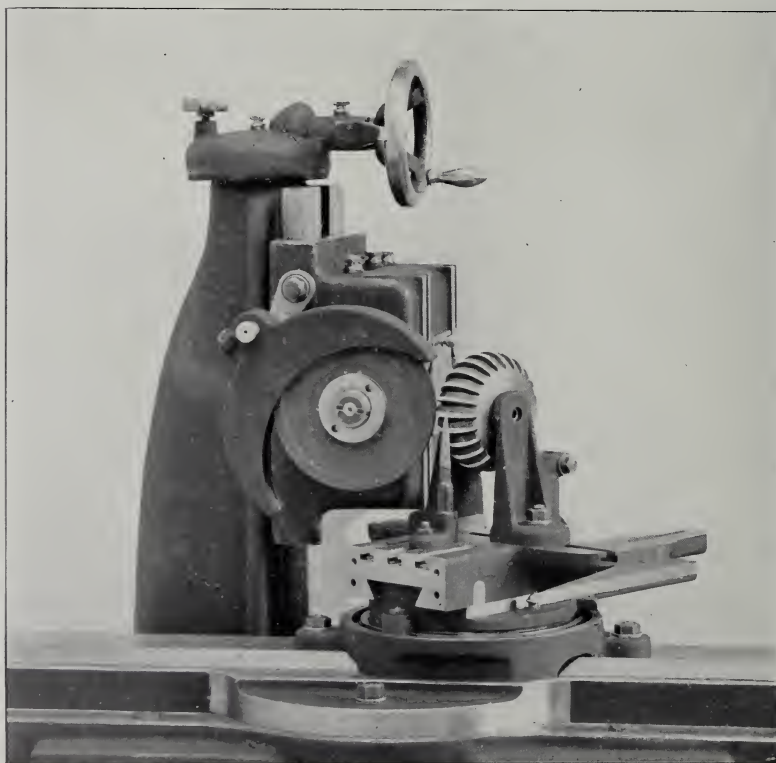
GRINDING THE TEETH OF A CONVEX CUTTER WITH A CIRCULAR GRINDING ATTACHMENT
